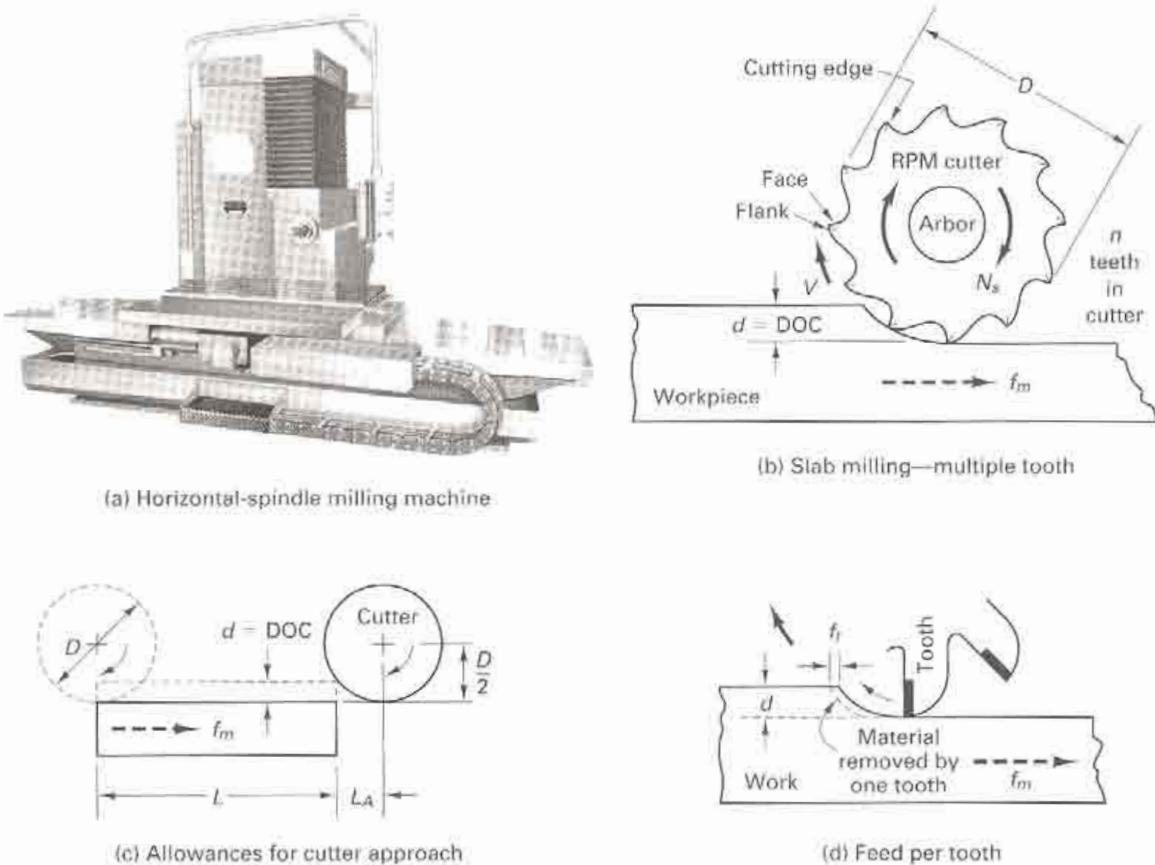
Peripheral milling can be performed on a horizontal-spindle milling machine. The cutter rotates at rpm N_s , removing metal at cutting speed V . The allowance for starting and finishing the cut depends on the cutter diameter and depth of cut, d . The feed per tooth, f_t , and cutting speed are selected by the operator or process planner.
